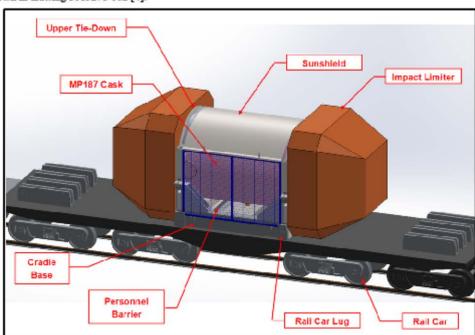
Family 4 Cradle Assembly Conceptual Design
